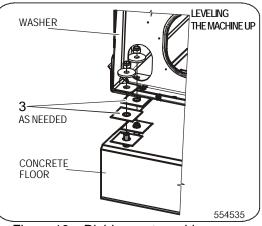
Rigid-mount machines, 18-24-28 kg / 40-55-65 lb – medium spin
